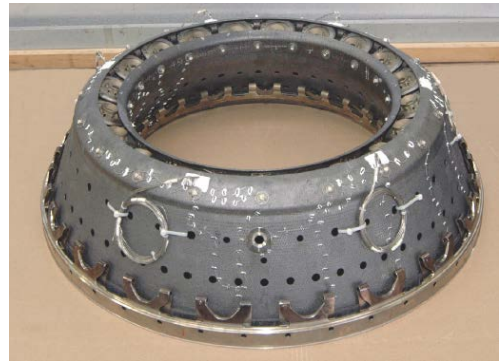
CFM56 Combustion chamber integrating outer and inner liner in CMC.
